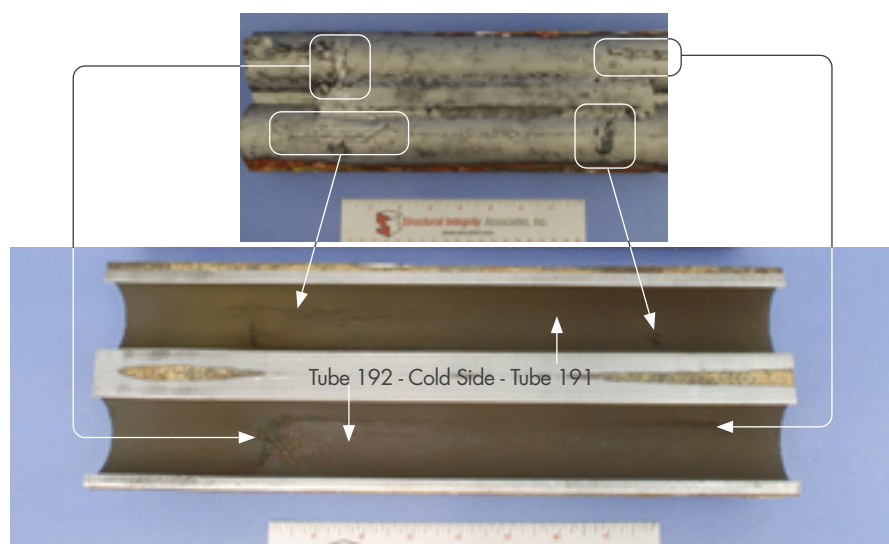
Additional photographs providing a visual representation of the OD surface pad welds and the resulting damage on the ID surface.
